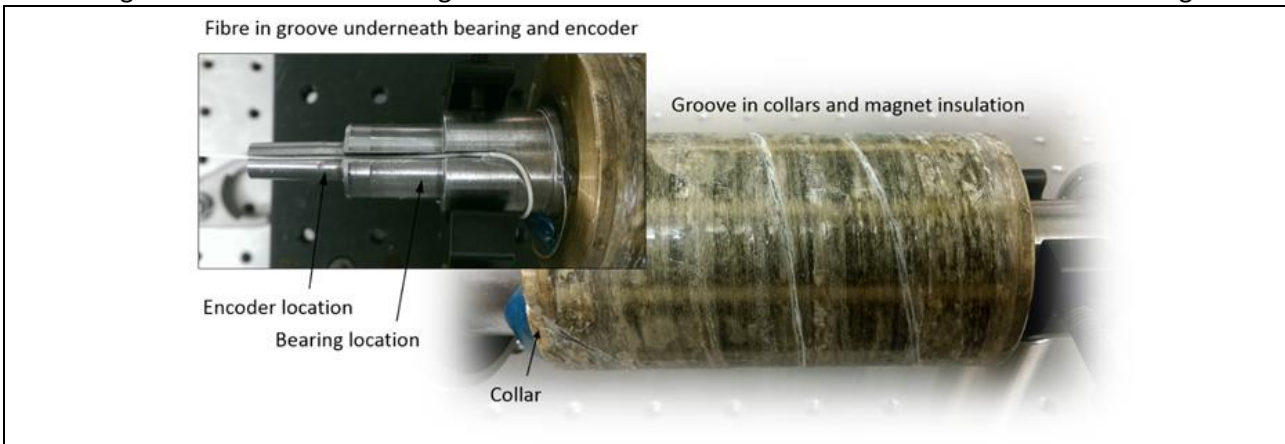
The sensor fibre routed along grooves on the rotor and shaft surface
